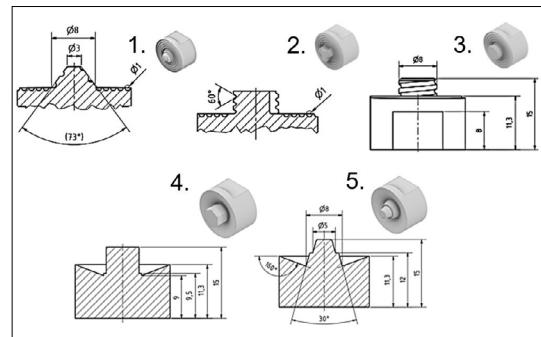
Designed FSW tools from 1 to 5 with dimensions.
